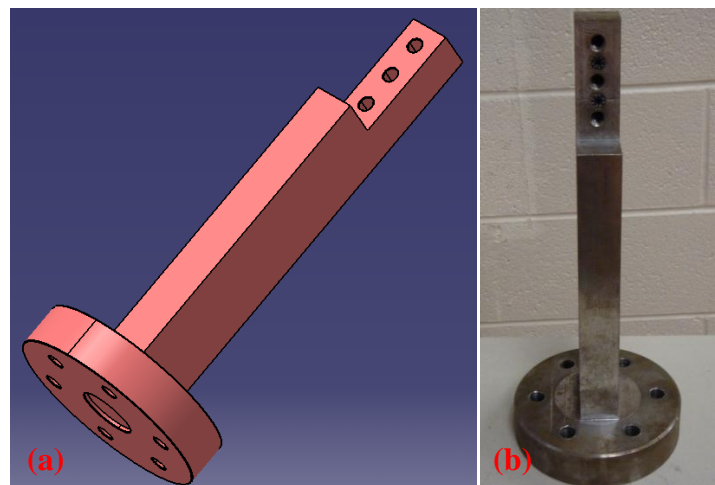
(a) CAD model of movable lower part (b) photograph of movable lower part of cyclic shear test fixture
